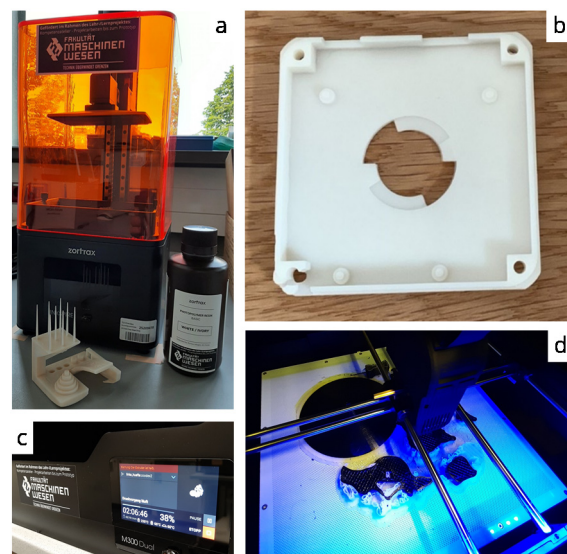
UV LCD printer (a) and housing part for portable prototype (b), dual filament printer (c) and printing of a hip model as a presentation aid (d).
